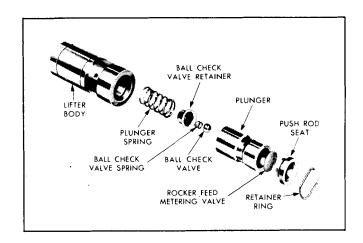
Hydraulic Valve Lifter - Exploded View
